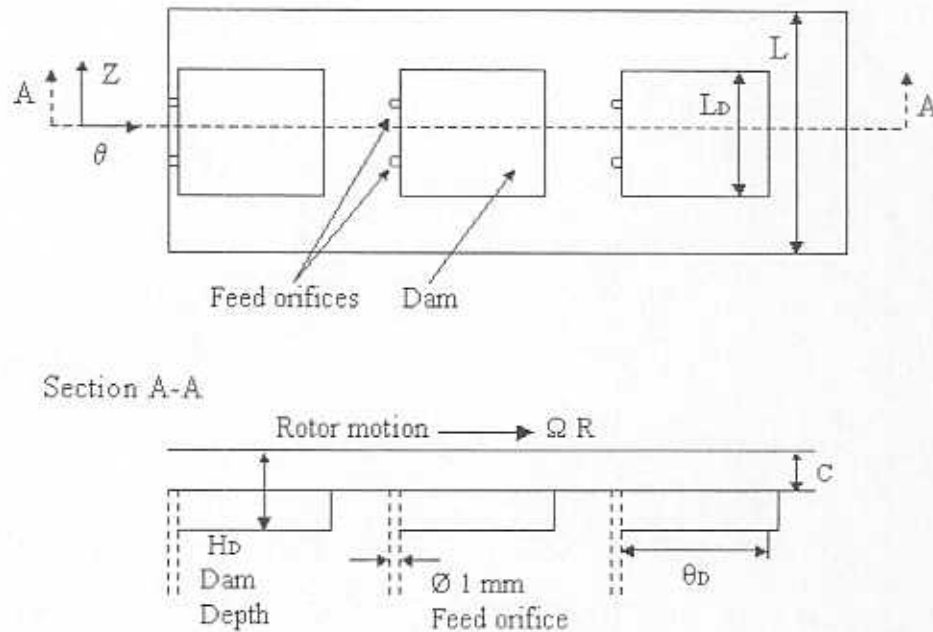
Unwrapped schematic view of the original pressure dam bearing
